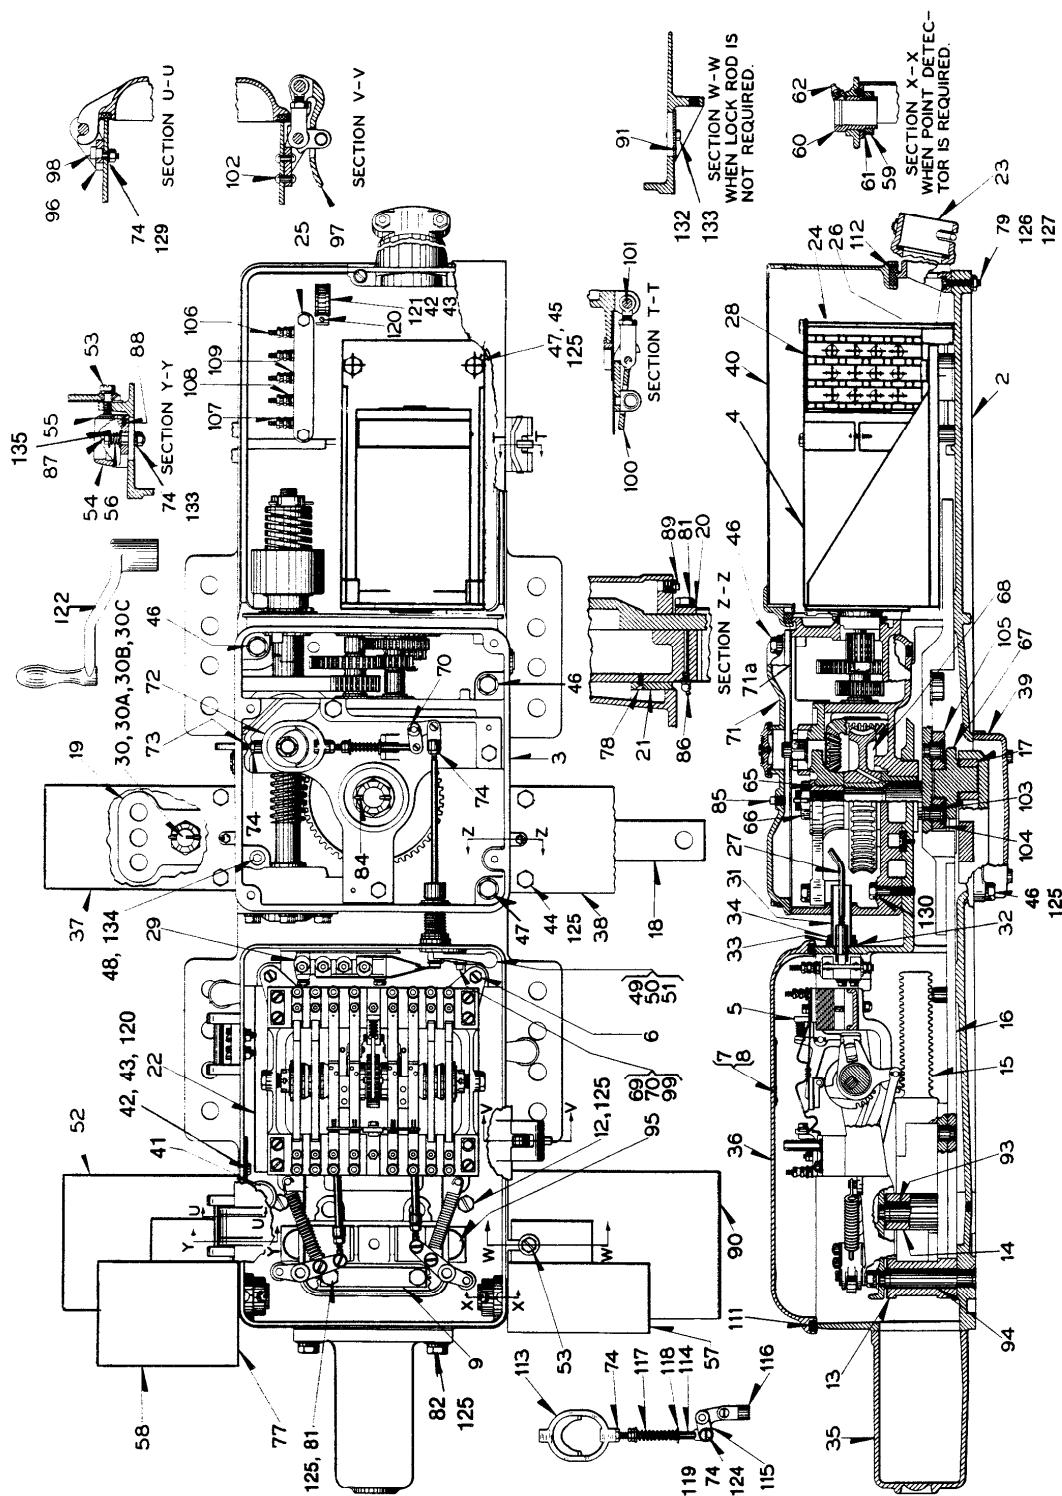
M-3 Switch Machine (Single Switch) Parts Location
